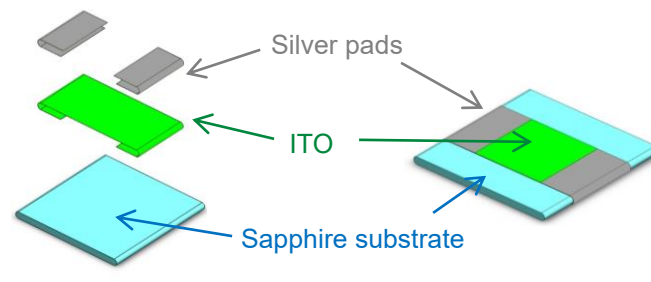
Exploded (left) and assembled (right) views of the IR heater.
